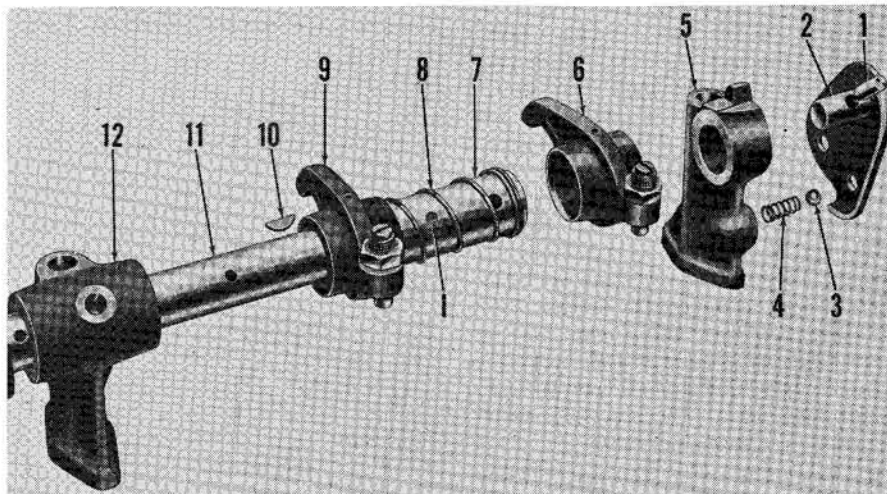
Exploded view of rocker arm assembly on models with front mounted decompressor lever. Late model "New FSM" will have rocker arms with self-locking adjusting screws instead of screw and lock nut shown. Eccentrics (7) with indent (1) can be used on all models with decompressor; earlier models had higher eccentric.
